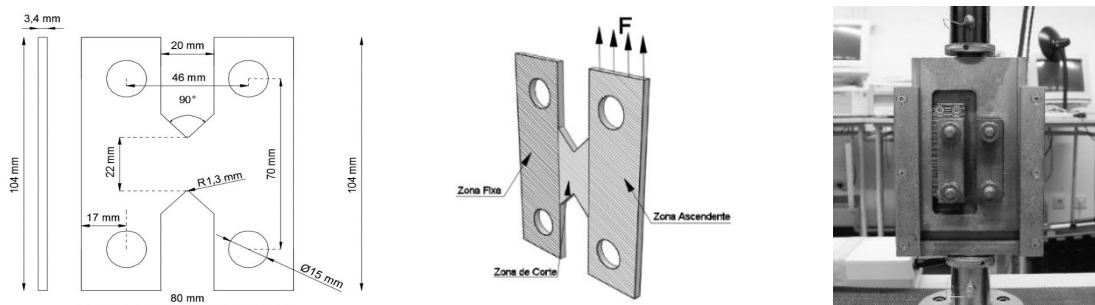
Specimens for the plane shear tests (schematics and test layout)
